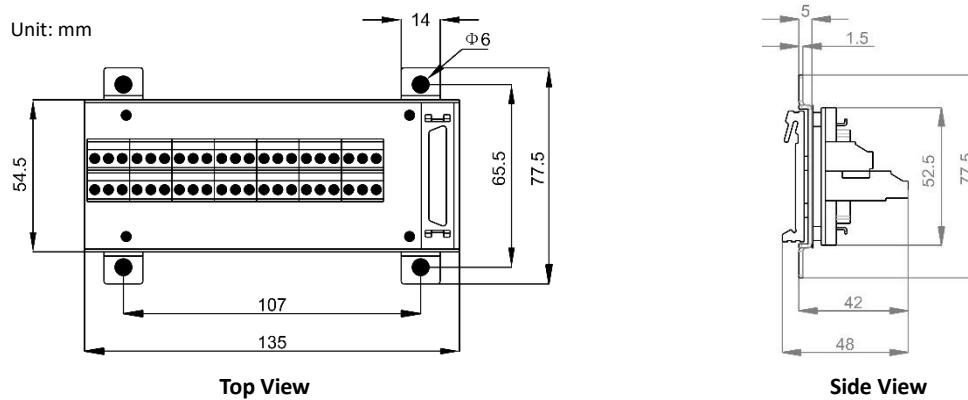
Dimensions of the Branch SCCT Adapter Board
